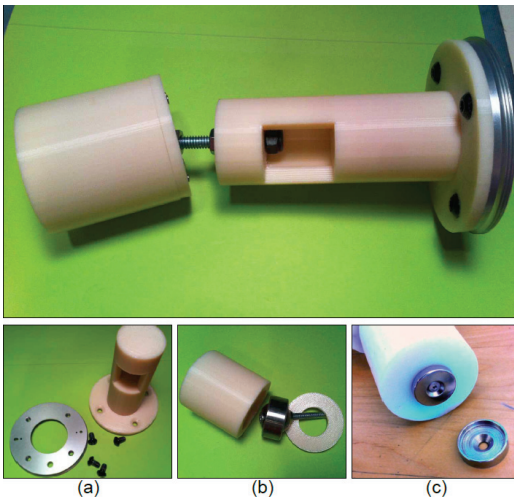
Robot attachment with details of mechanism pieces: (a) plastic base cylinder, (b) ball joint and socket, (c) rare-earth magnet.
